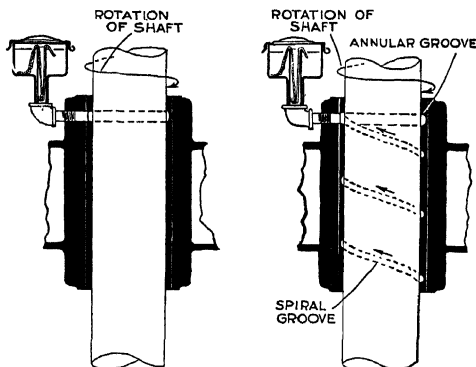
Suggested grooving for vertical bearings. Most vertical bearings do not require grooving. Sometimes an annular groove (left) is desirable; in a few cases a spiral groove (right) cut in the proper direction may be desirable to minimize leakage. (Courtesy Socony-Vacuum Oil Co.)
